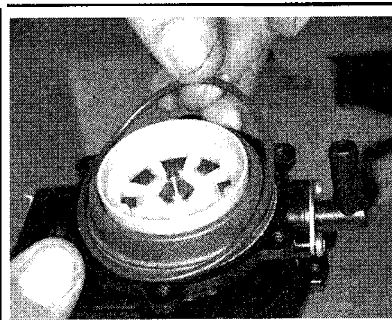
During assembly, position O-rings carefully to keep them from getting pinched or cut
